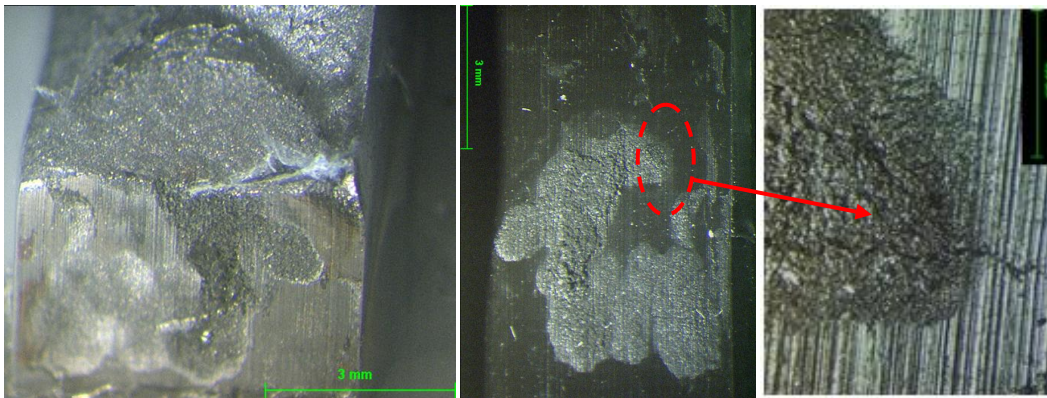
Specimen 10 – Fracture surface and replica of the fatigue crack initiating from the large crevice corrosion flaw after 6000 cycles
